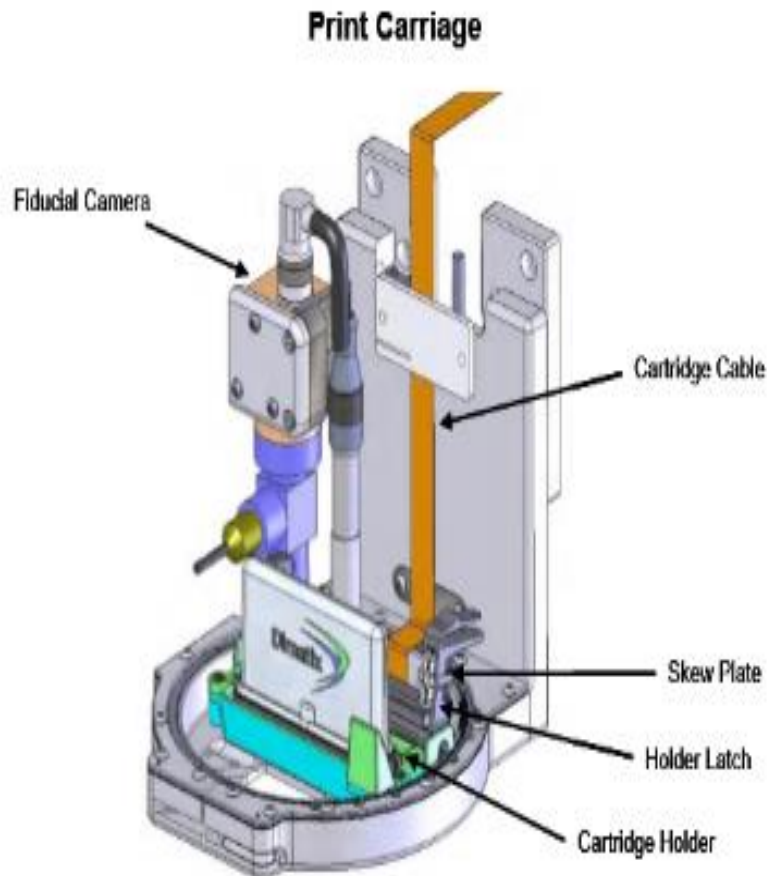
Shows the major components of the Fujifilm Dimatix Materials Printer DMP-2831 print Carriage [153].
